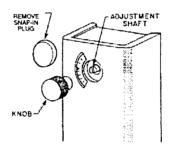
Drawing showing snap-in plug removed and the knob in line to assemble. Press the knob onto the slotted shaft.
